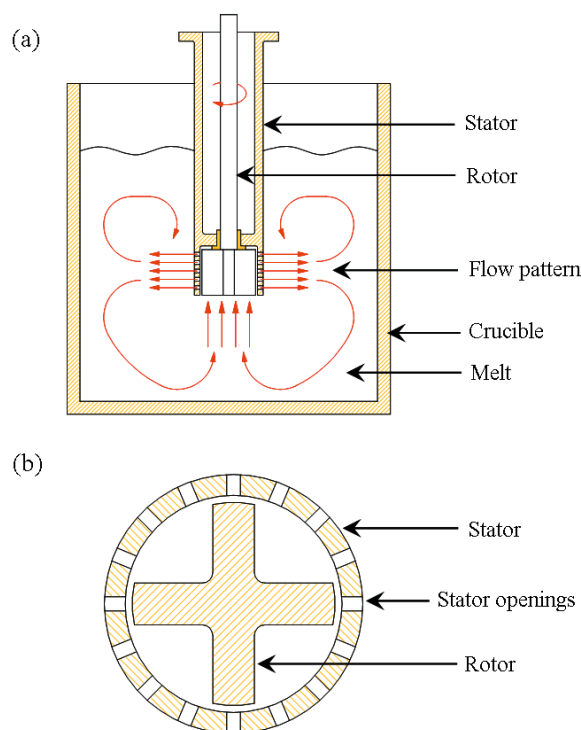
The new rotor-stator high shear device for conditioning of liquid melts by application of intensive melt shearing, (a) inside a crucible of melt illustrating the macroscopic flow pattern and (b) bottom view of the high shear device.
